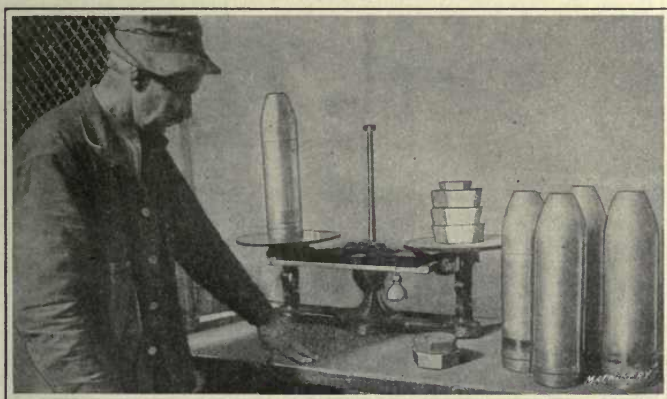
Weighing French 120-millimeter High-explosive Shell
